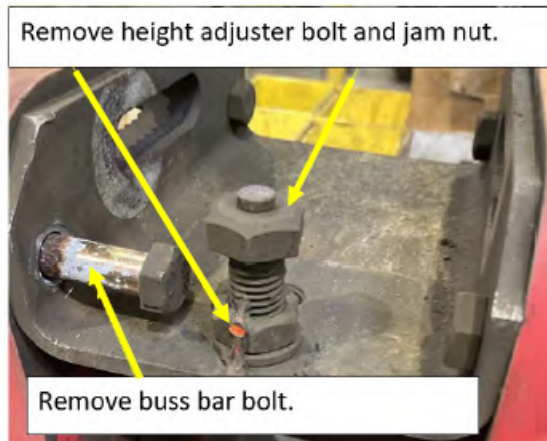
Height adjuster bolt, jam nut, and buss bar bolt.
